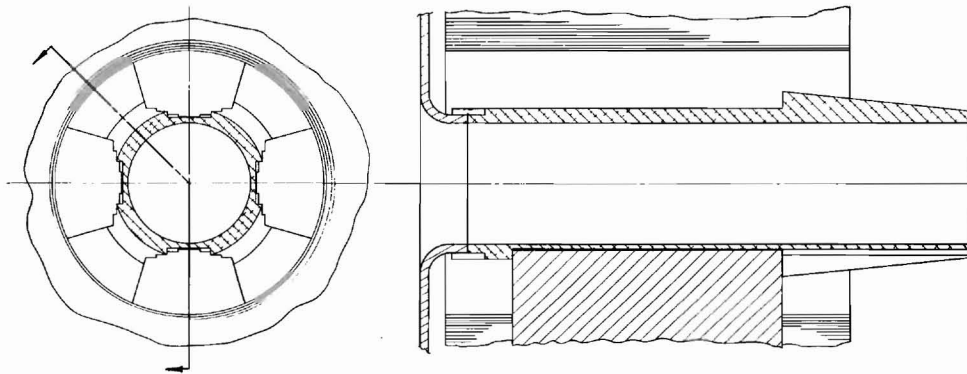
Drift tube bore cylinder pole tip positioning jig.
